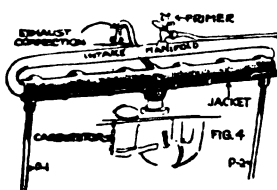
Franklin exhaust method of heating the mixture. Note jacket which encloses intake manifold through which exhaust gas passes. A cut off is provided when engine becomes very warm. P1 and P2 pipes are left open.
